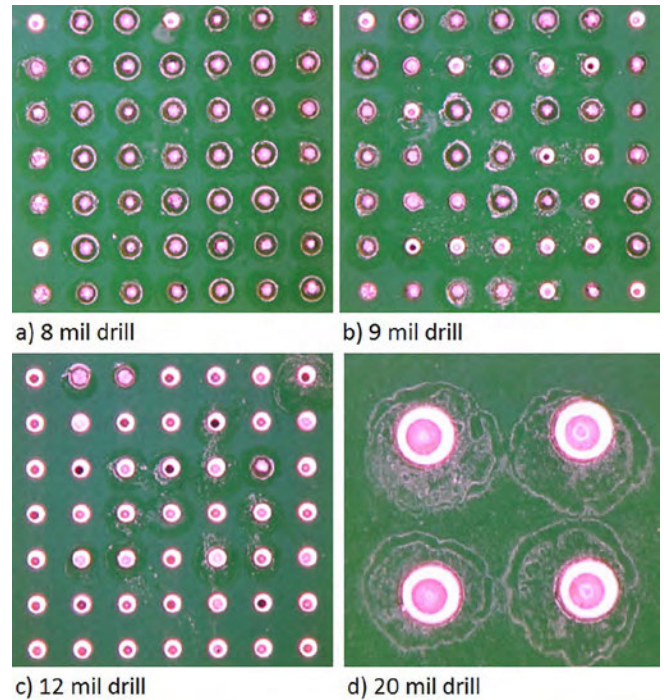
Solder protrusion images for 8, 9, 12, and 20 mil reflowed using 2.4 mm thick board.
